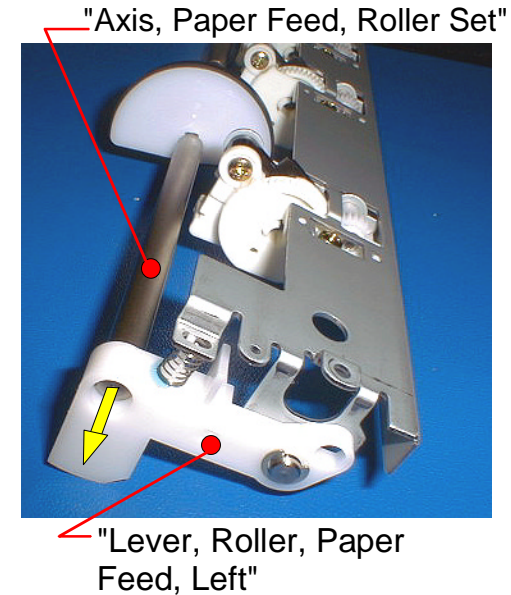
Installing left side of "Axis, Paper Feed, Roller Set"
